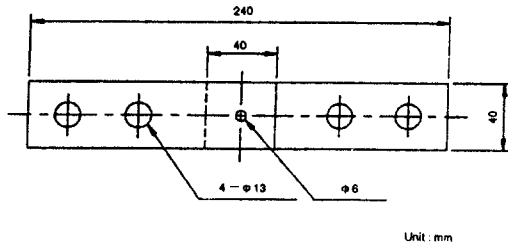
Shape of spot welded tensile shear specimen
